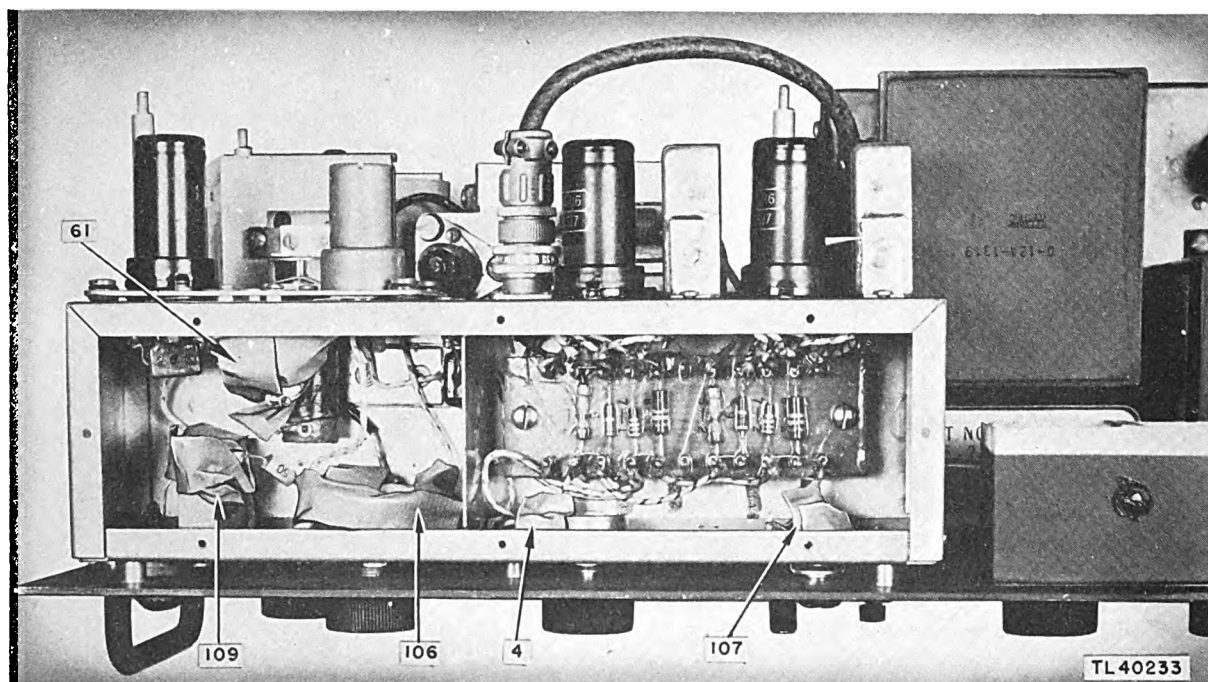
Signal Generator I-222-A, top view showing masking tape.
